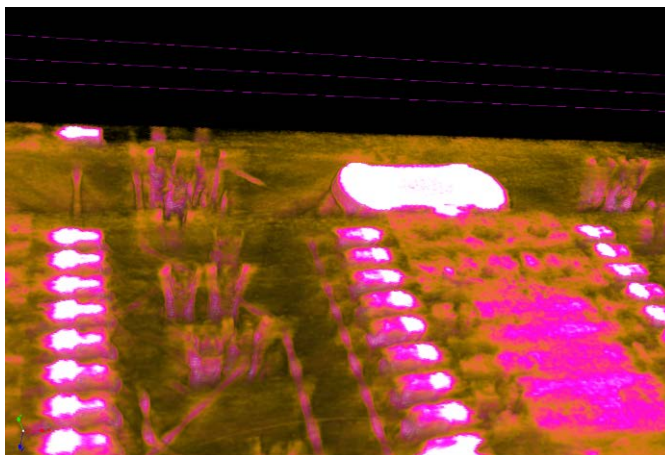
Highlight of solder joints on small-outline integrated circuits (SOIC) to the PCB's pads. The metal frame inside the package interferes with observation under the package. Sample 3.
